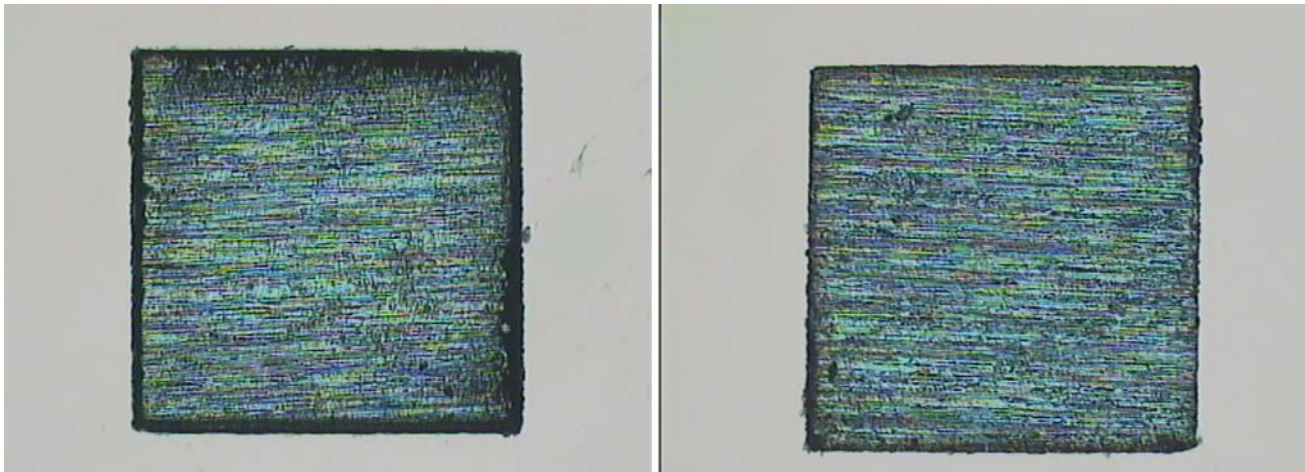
Cut-out produced using P=75% setting of Laser A with entrance side (left) and exit side (right).
